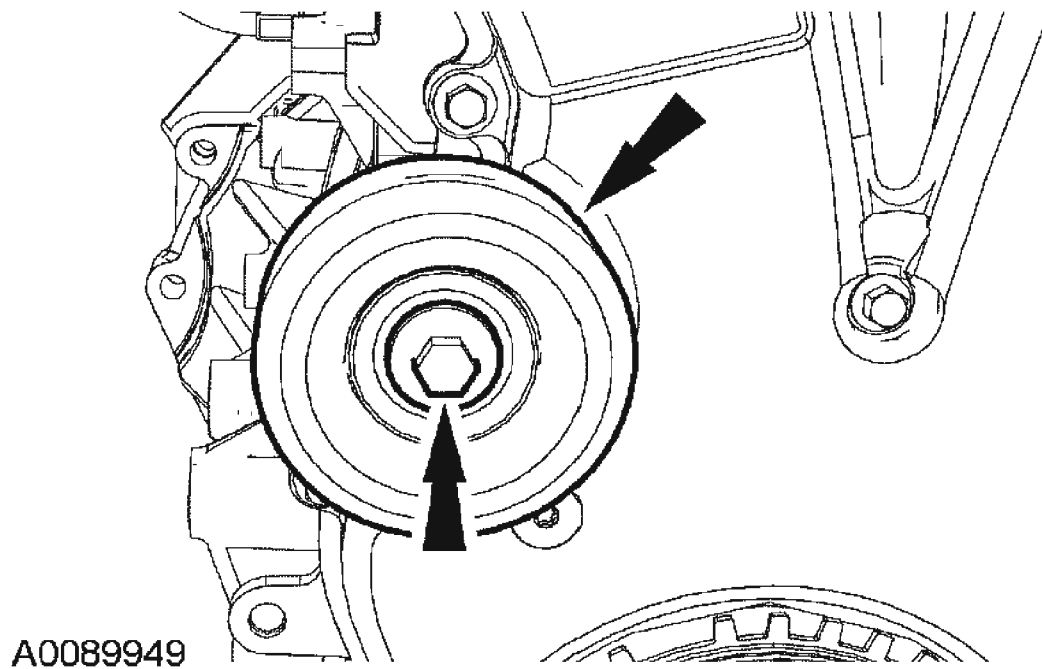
Loosening Bolt And Removing Accessory Drive Belt Idler Pulley
